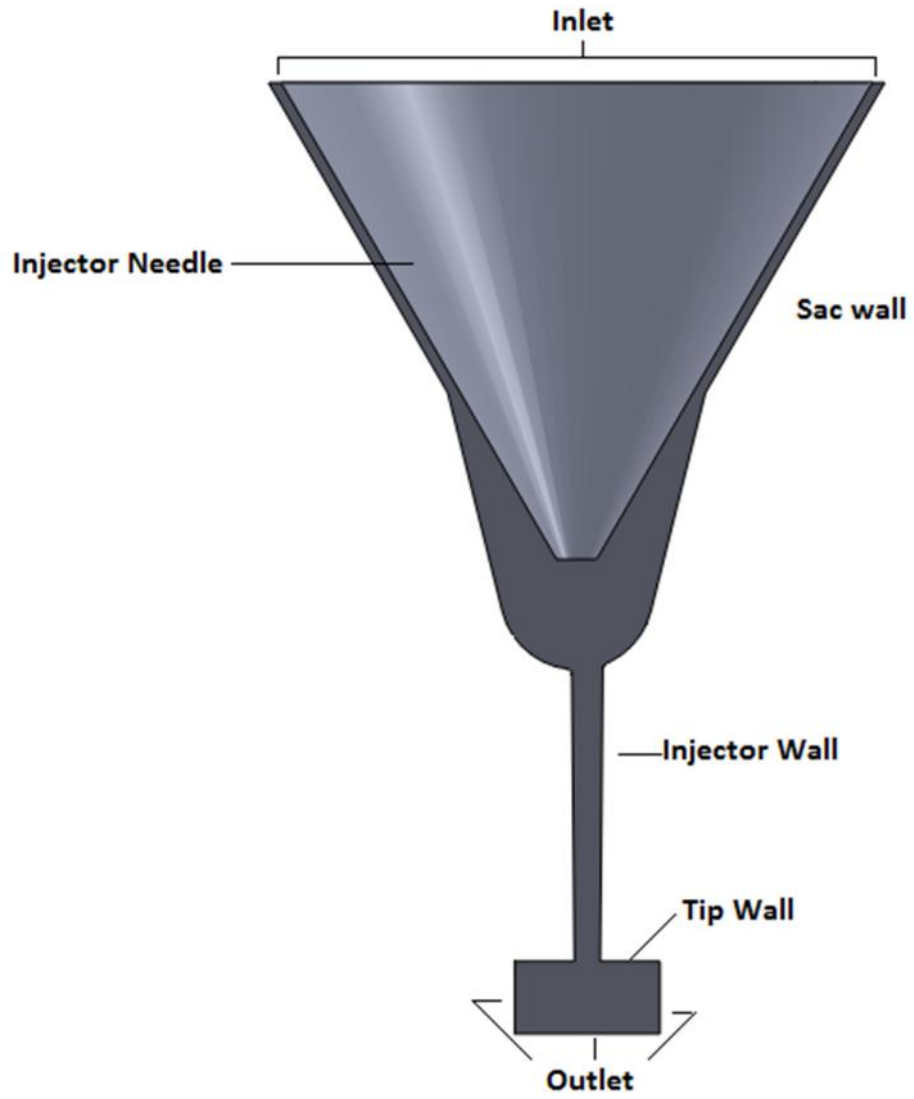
Sectional view of the CAD model generated in the YZ Plane.
